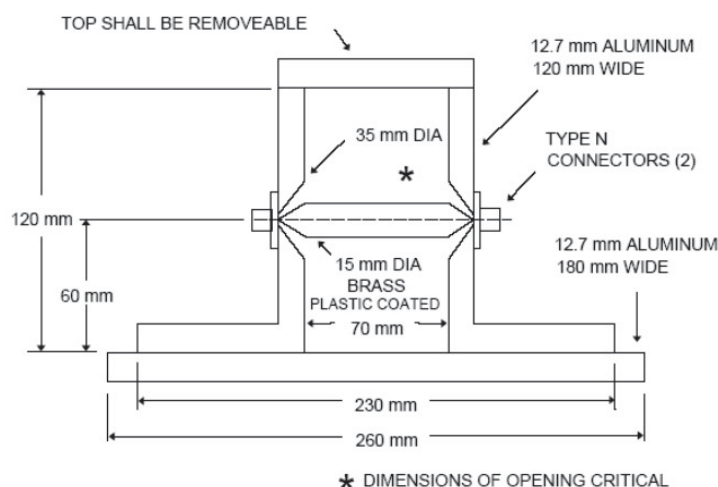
UG-14: Bulk Current Injection Test - Recommended Calibration Jig Design (ref. MIL-STD-461E)
